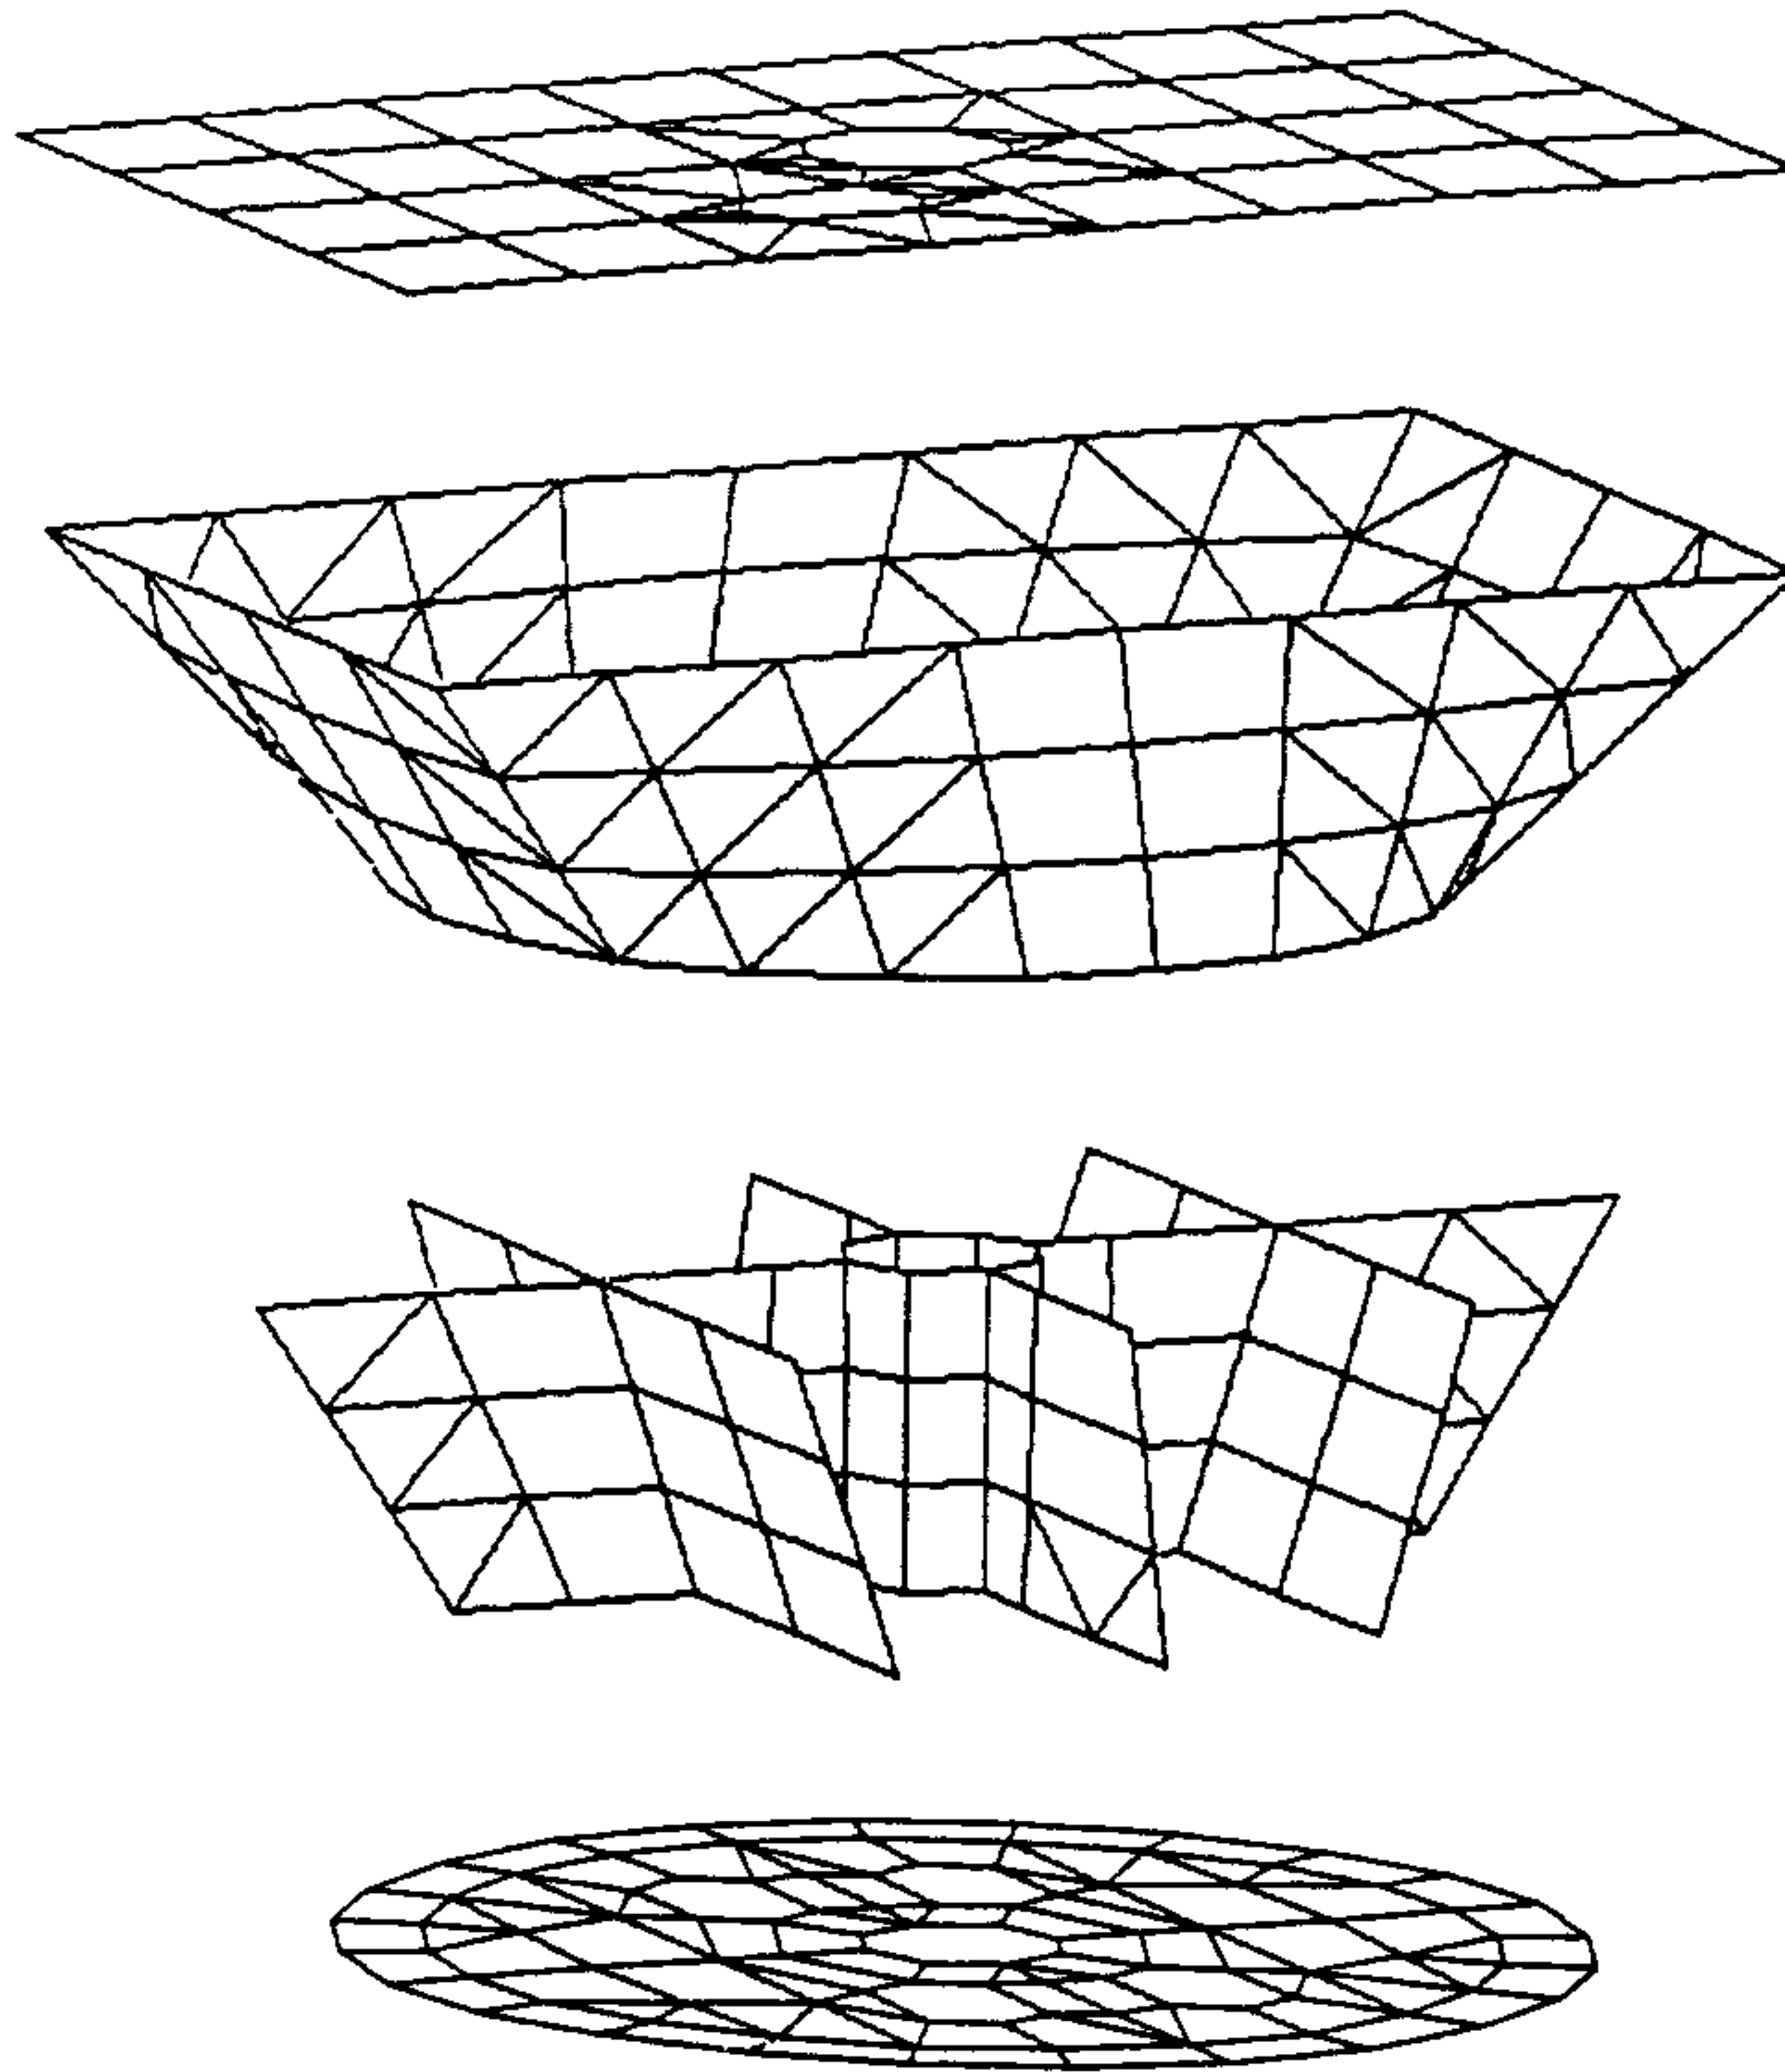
Exploded view of the "base" portion of the fork. The top horizontal plate is 3/4" thick and includes a 15" x 22" hole for personnel access into the fork and lower cone. The outer shell is a transition which is rectangular at its top end and circular at its lower end, and is 3/4" thick. All internal plates are 1/2" thick except the central tube for utilities clearance, which is 1/4" thick. The bottom plate of the real weldment is planned as 1 3/4" thick except near the edge, where it is machined to 1 1/8" thick. The azimuth drive disk in the real telescope is planned as 1 5/8" thick in the central area and 2 1/2" thick at the rim. These two plates were combined in the model as a single 2" thick plate with a steel modulus, but artificially high mass density. Note that the center of the bottom plate ties to the internal webs and the central tube, and that there are four 15" x 22" oval holes to allow personnel access to the base (from the cone) for routing utilities, etc.
